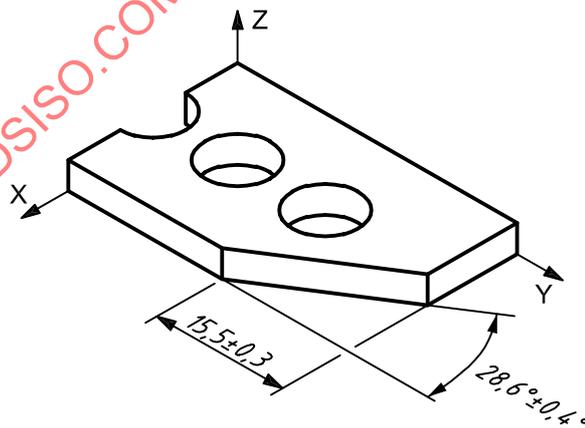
Attachment techniques — Fillets, rounds and chamfers
